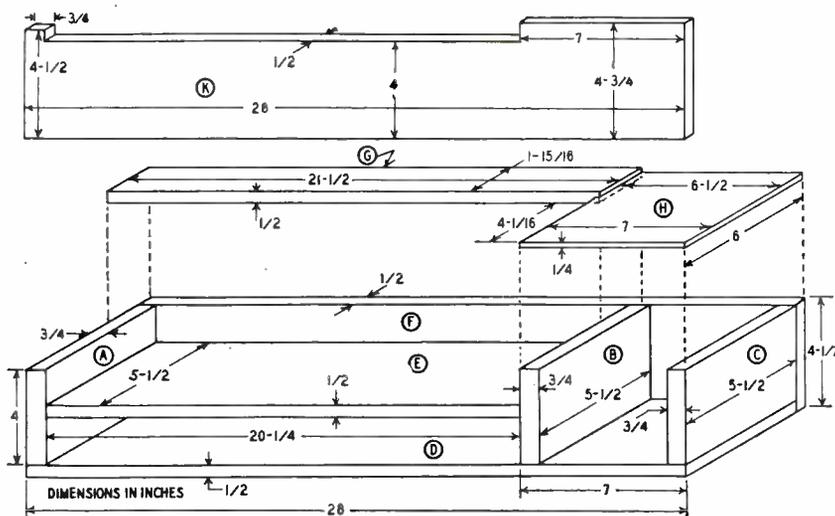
Exploded diagram of the keyboard housing showing assembly details.
